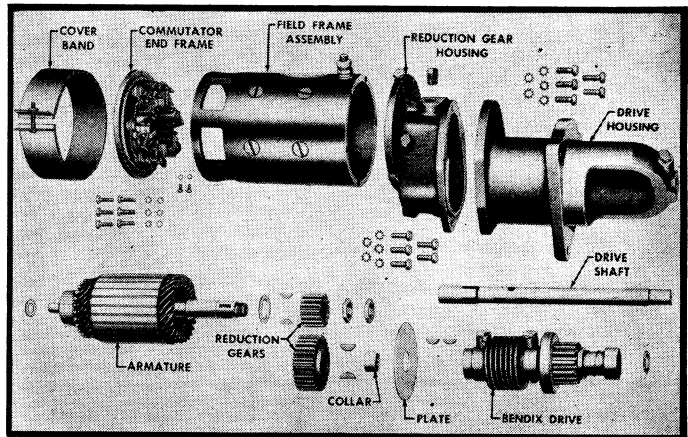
Exploded view of starting motor with a standard Bendix Drive
